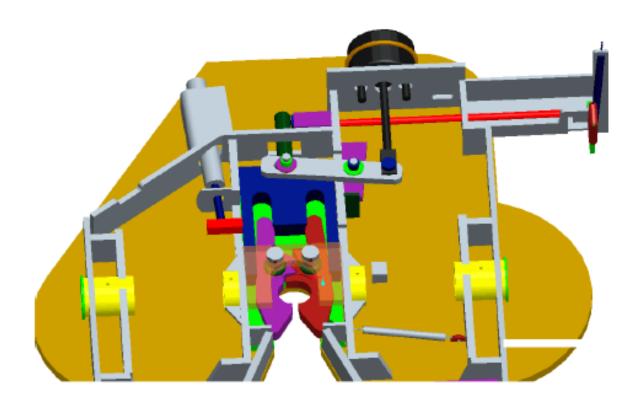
Bottom View of 5th Wheel Locking Jaws When The Jaw Fork Is Not Fully Engaged
